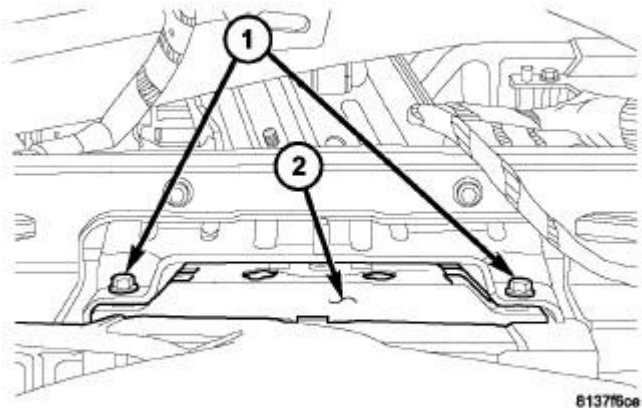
UPPER COLUMN MOUNTING BOLTS
